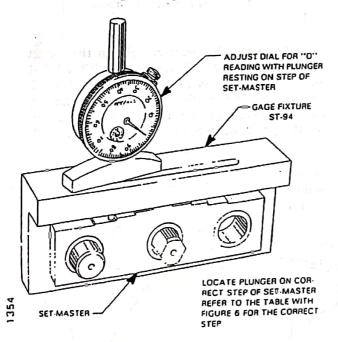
Depth Gage Adjusted with Set-Master Preparatory to Checking Line Position of Counterweight Bushings
